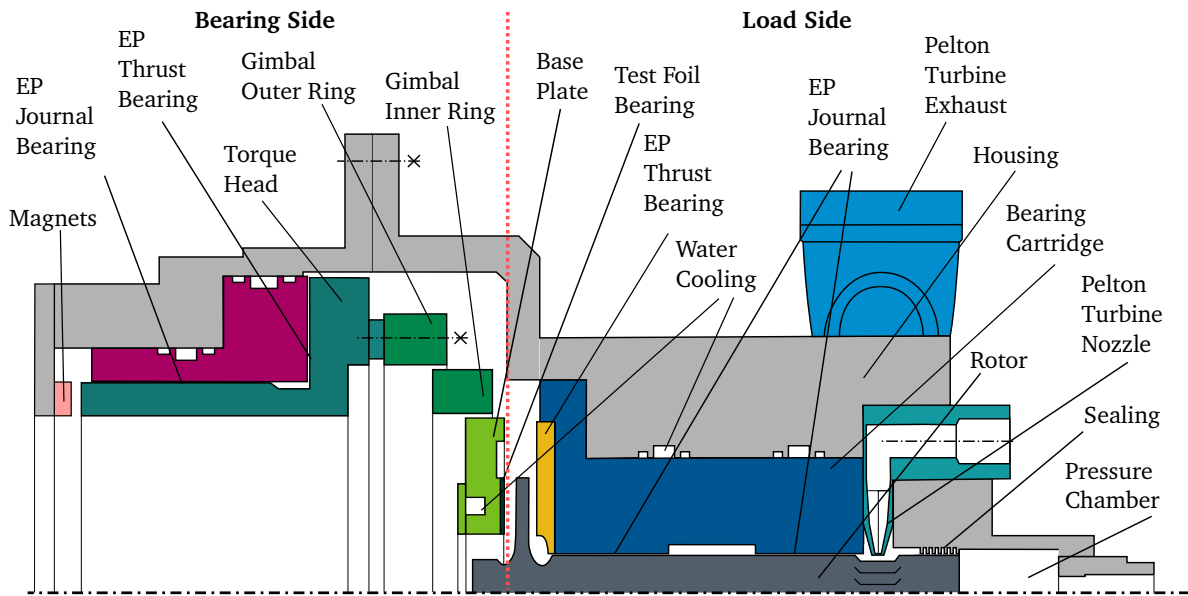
Sketch and basic components of the thrust bearing test rig.
